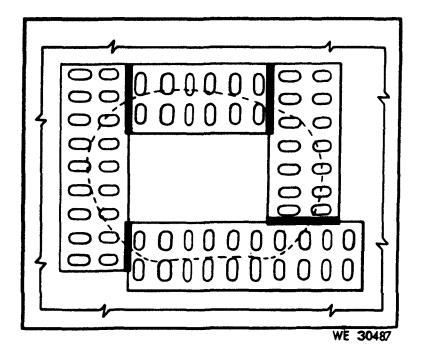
Butt strap weld on face hardened armor.
